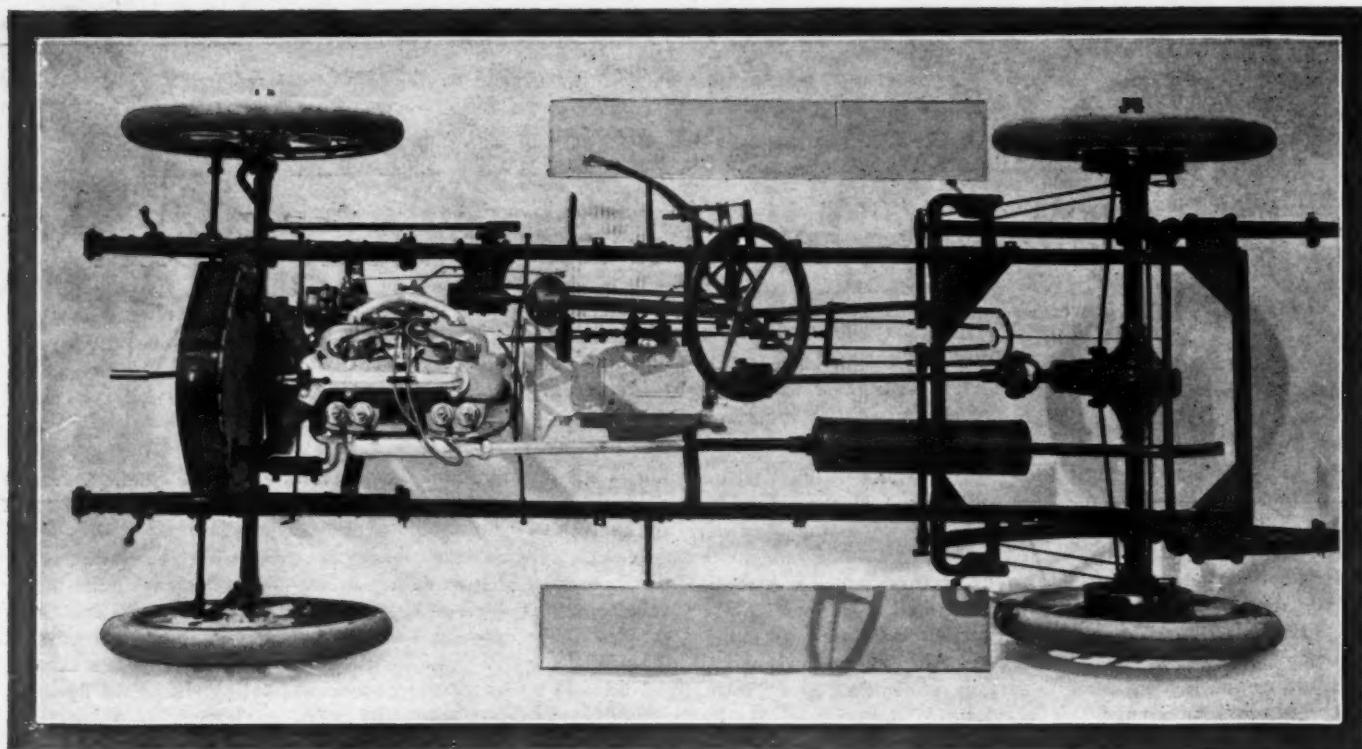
Plan view of the Maxwell Mascotte chassis, showing the assembly of the motor with its three-point suspension and other details
